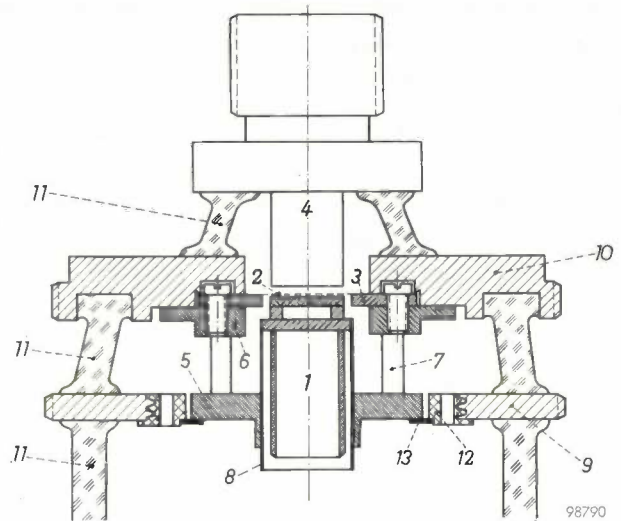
Construction of the 5 cm triode. The darkly shaded section is pre-assembled. 1 cathode. 2 grid. 3 grid frame. 4 anode. 5 cathode ring (molybdenum) with welding collar (nickel). 6 grid ring (molybdenum). 7 sapphire rods joining the rings 5 and 6. 8 tantalum foil cylinder of cathode, welded to the nickel collar of cathode ring. 9 cathode disc. 10 grid disc. 11 glass envelope rings. 12 closing ring with pump holes. 13 contact foil.
